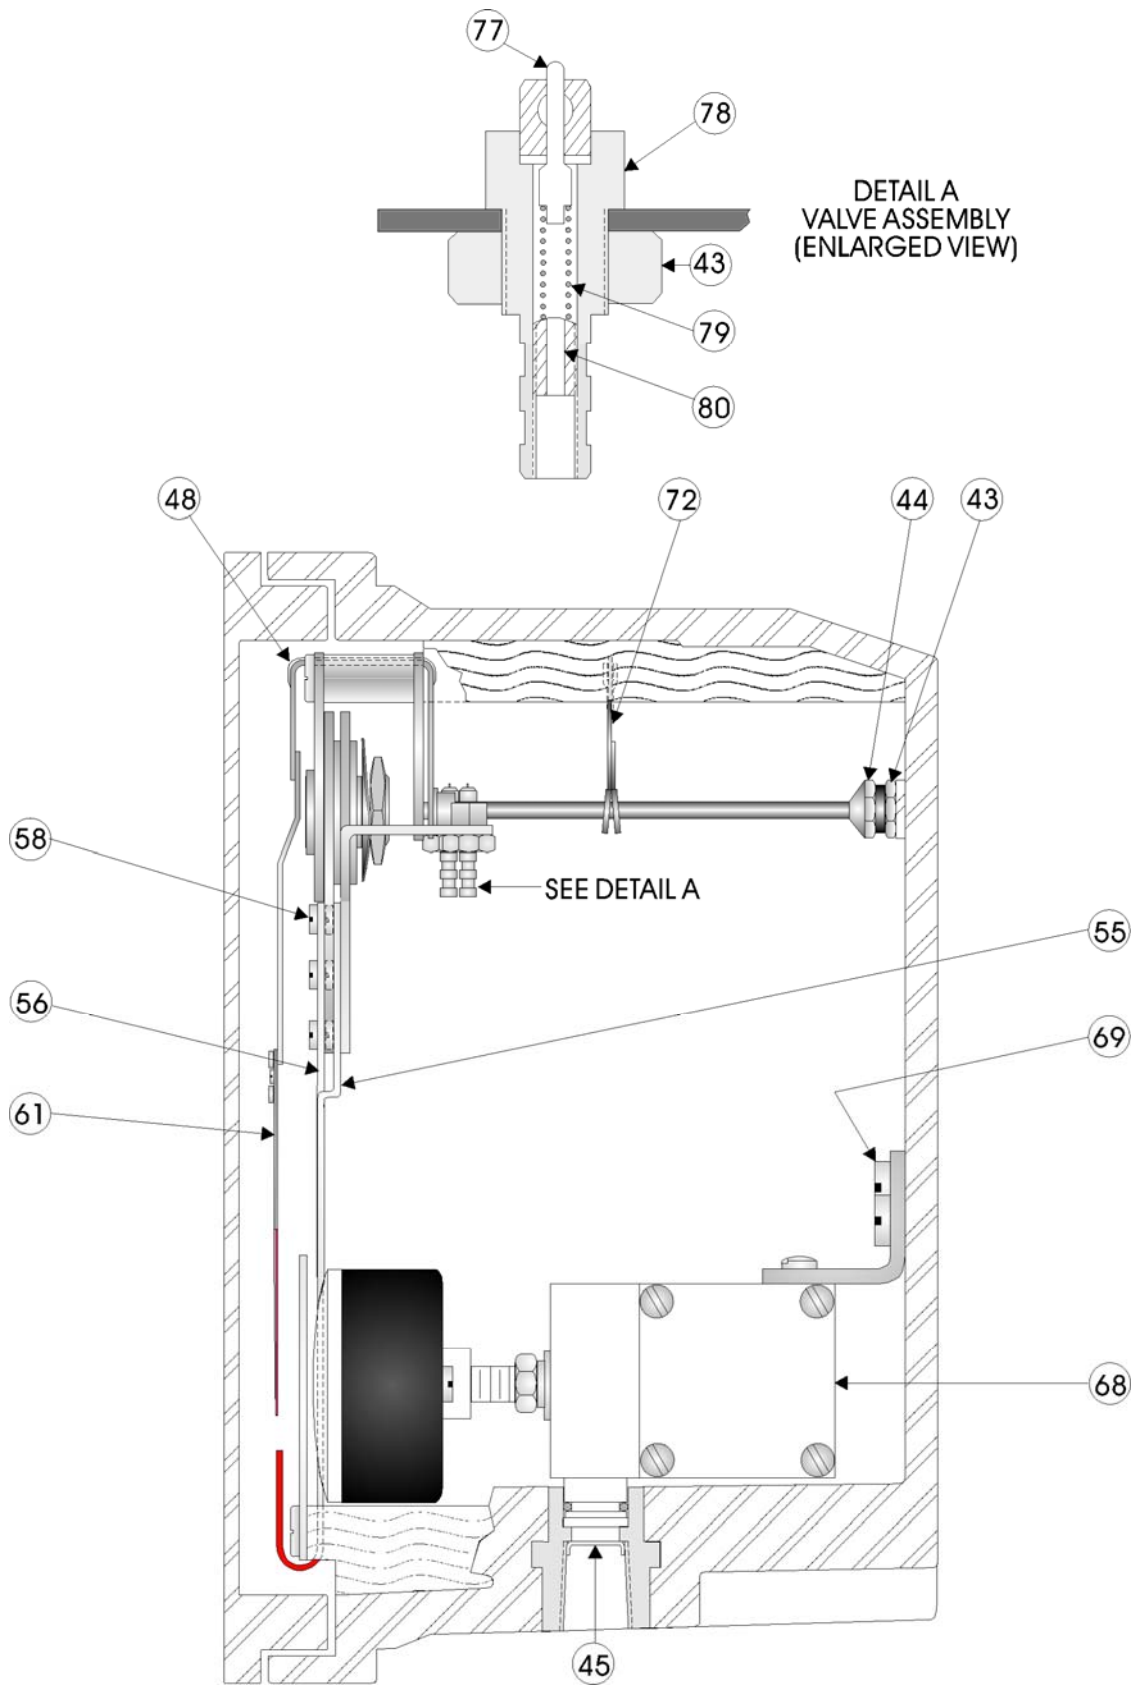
B - Diff. Gap Controller Instrument Assembly (Less Measuring System)
